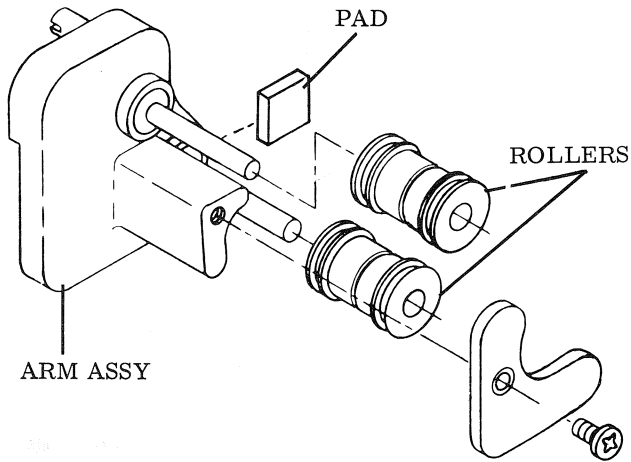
TAKE-UP SPROCKET SHOE ARM COMPLETE
